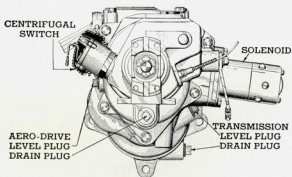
Rear View of Aero-Drive. The Centrifugal Switch Which Controls Cut-in Speed Is Not Adjustable Except by Changing Switch Unit.
